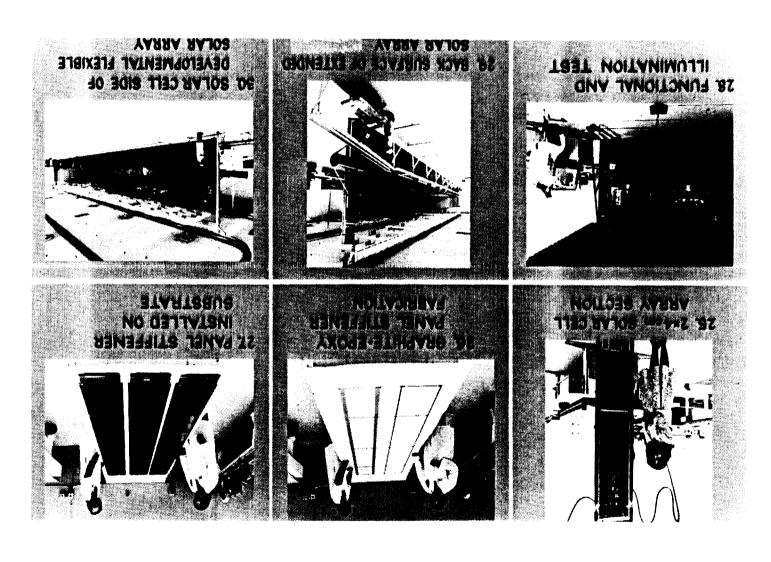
Fabrication, Assembly, and Test of SAE Wing (cont.)
